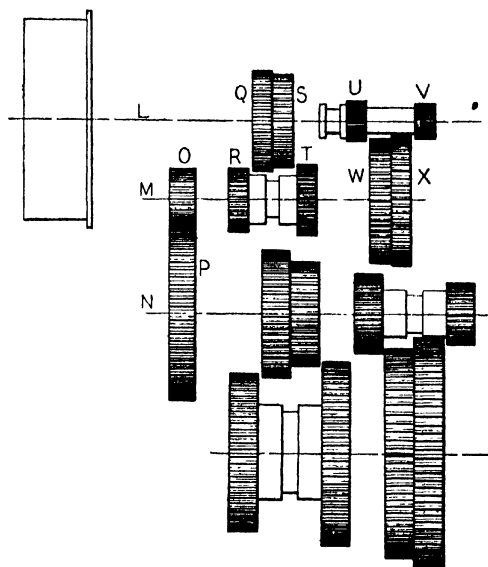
Lay-out of sliding gears to give sixteen changes.
